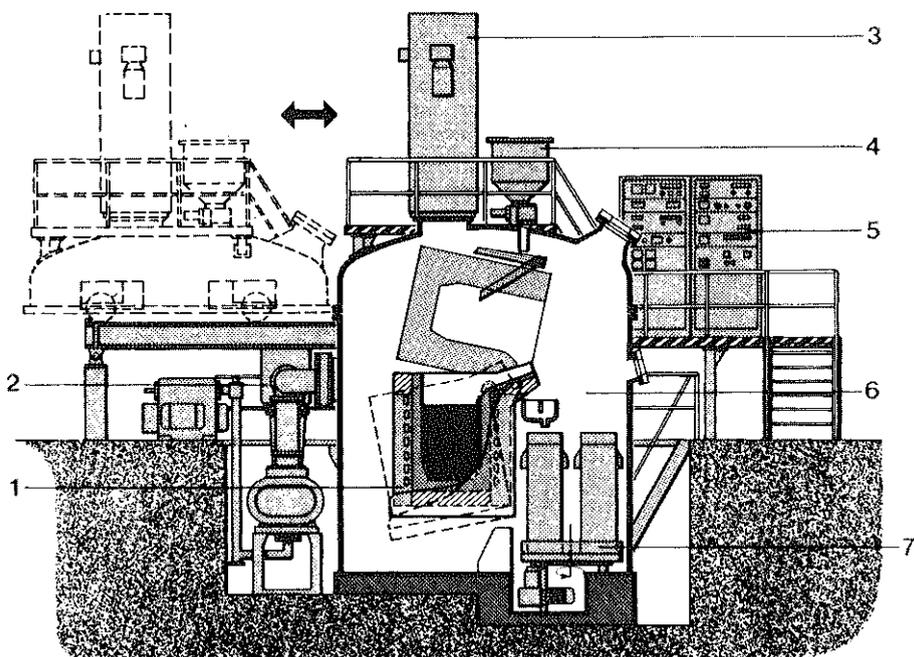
Schematic of a typical vacuum induction melting furnace. 1, furnace insert; 2, vacuum pumping system; 3, bulk charger; 4, fine charger; 5, control cabinets; 6, melting and mold chamber; 7, mold turntable
